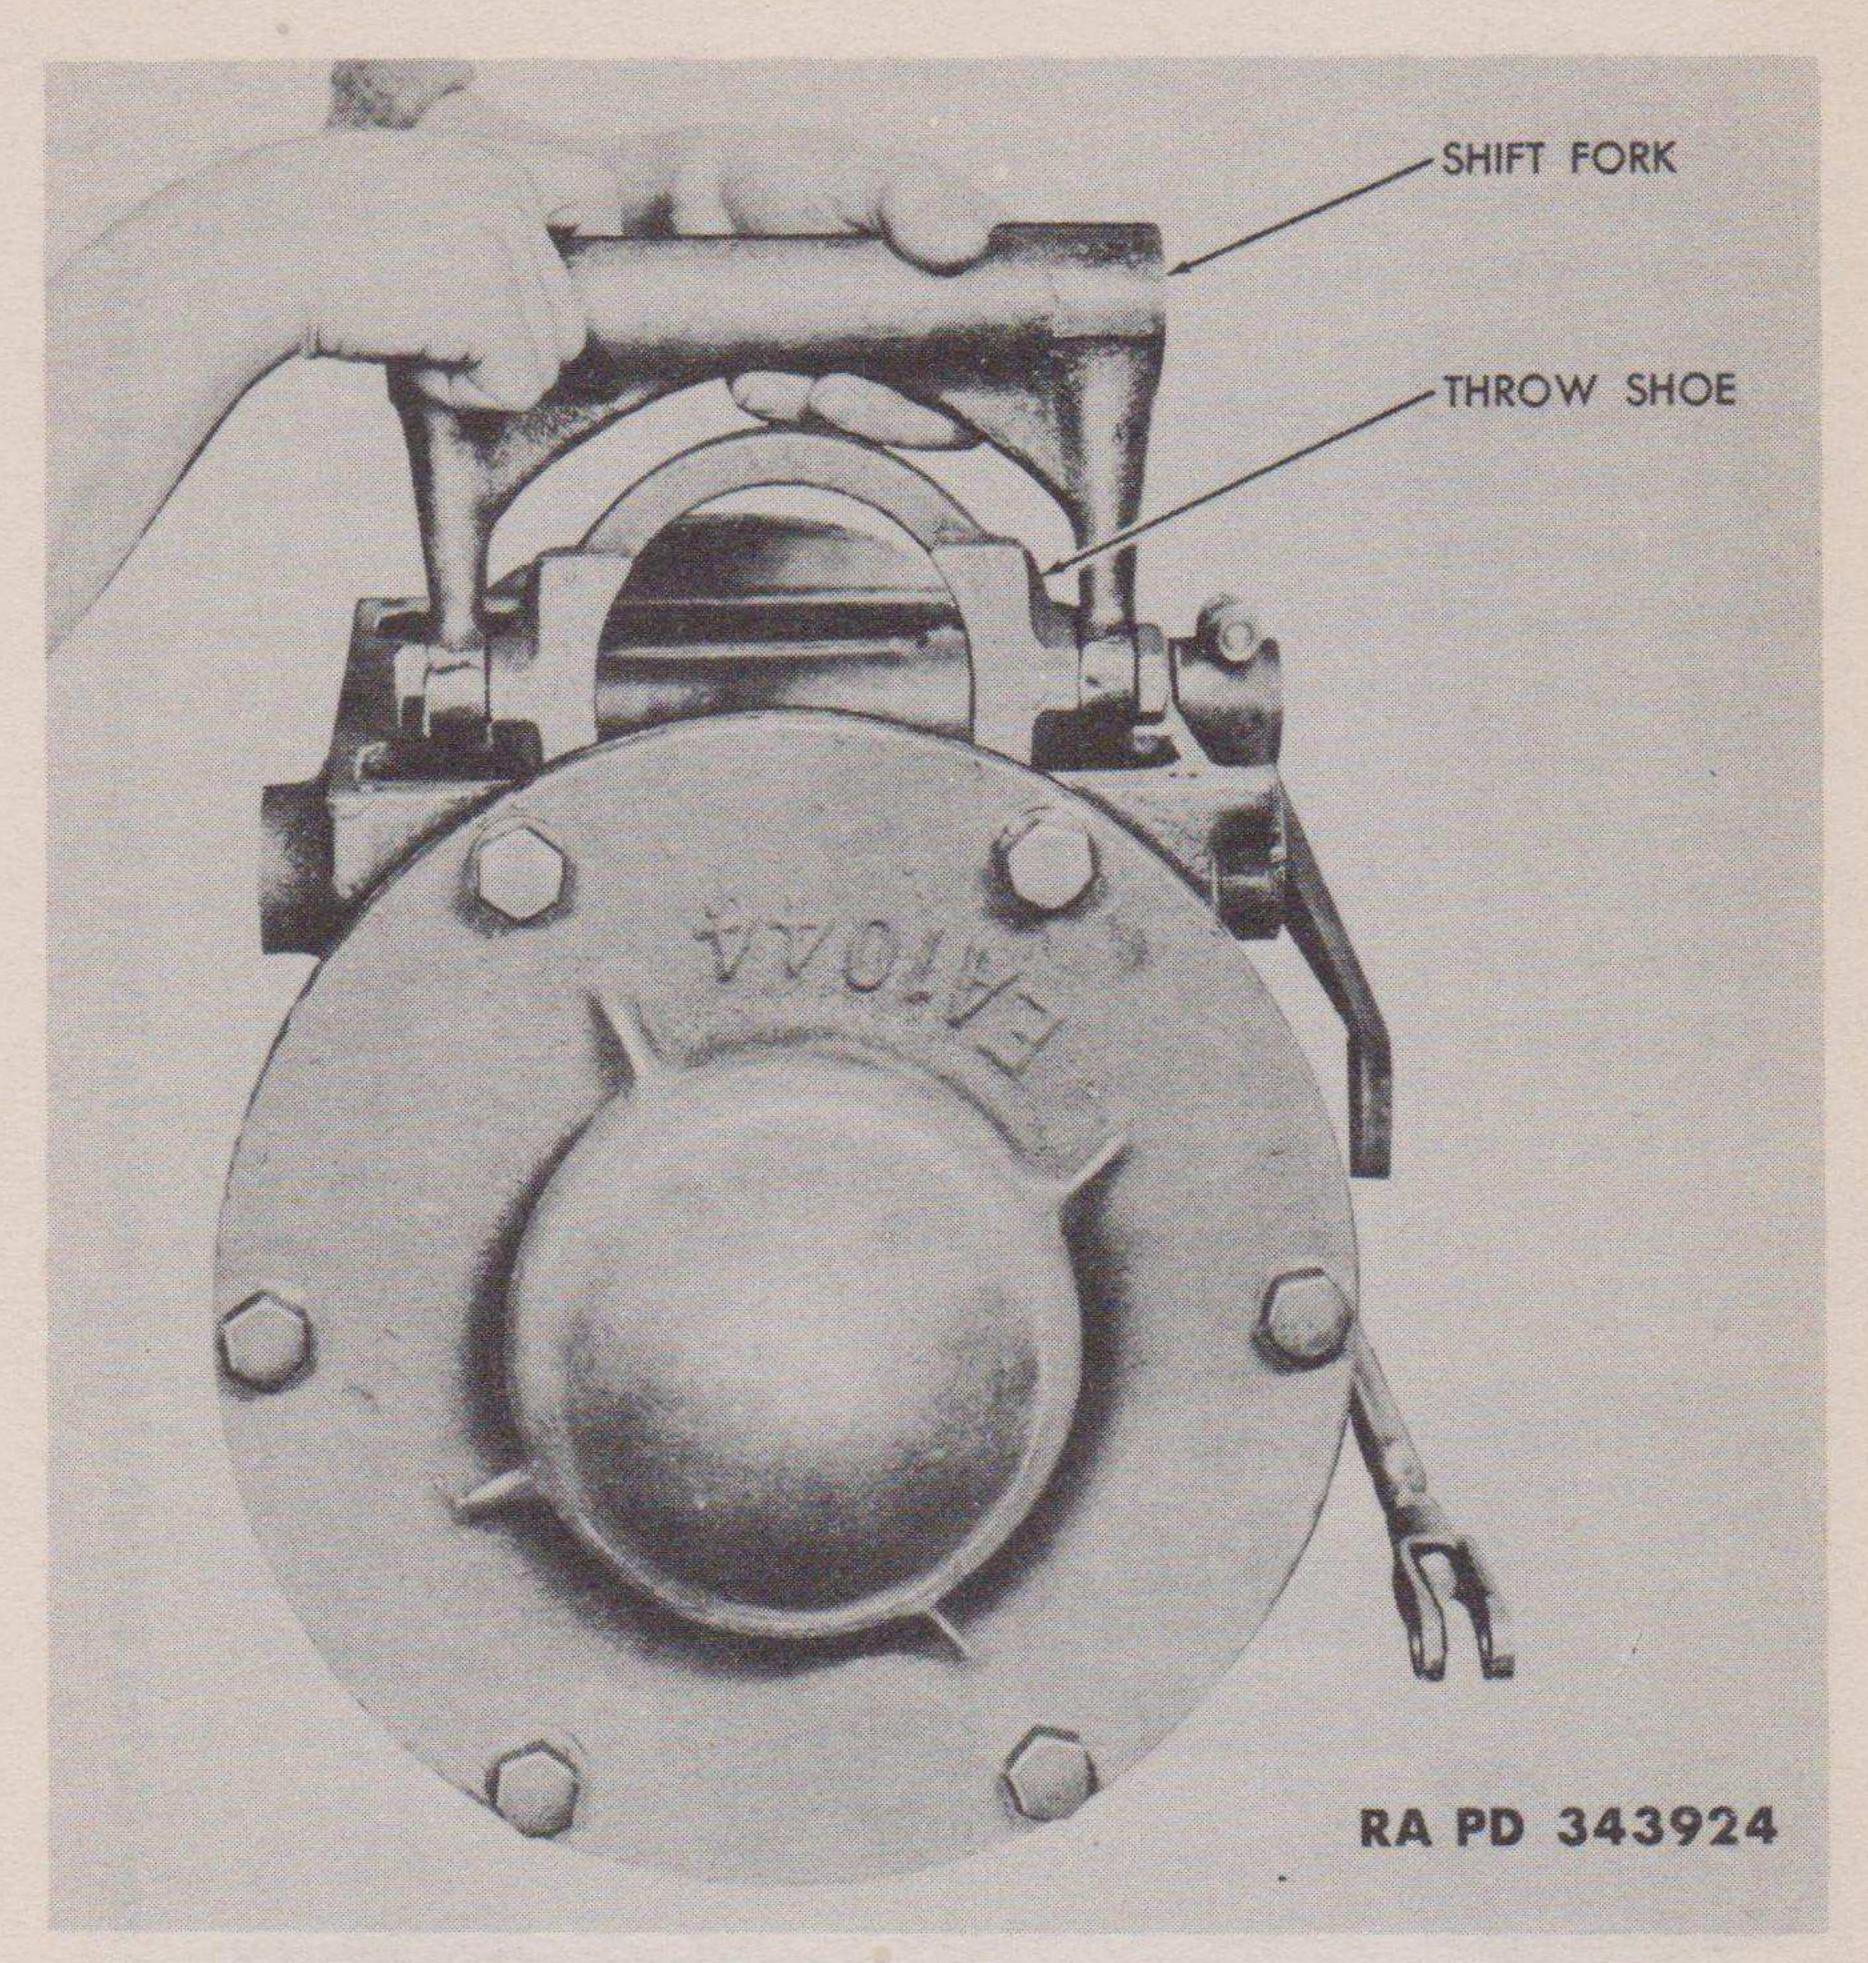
Removing Shift Fork and Throw Shoe Assembly
